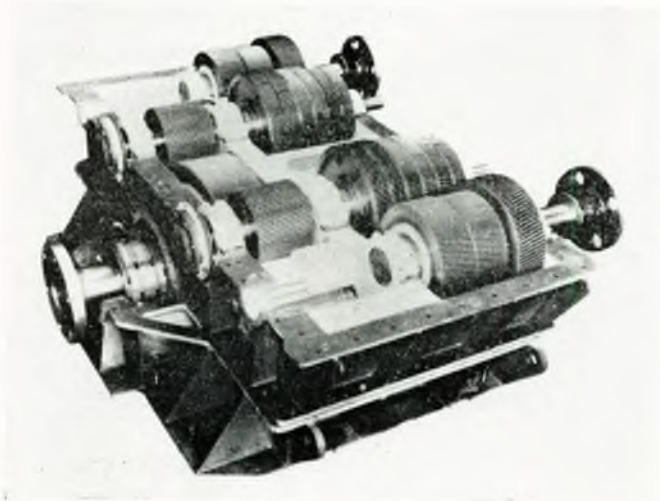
Twin-input, single-output gearbox as used in multi-engined arrangements
